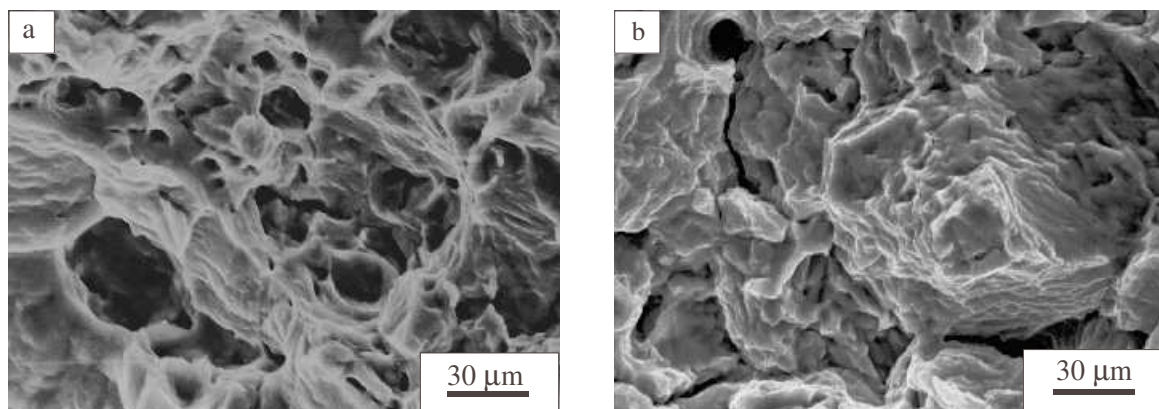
Fractography of industrial bronze B6 after tension at elevated temperature: (a) mixed fracture, 310°C, (b) intergranular-ductile fracture, 350°C
